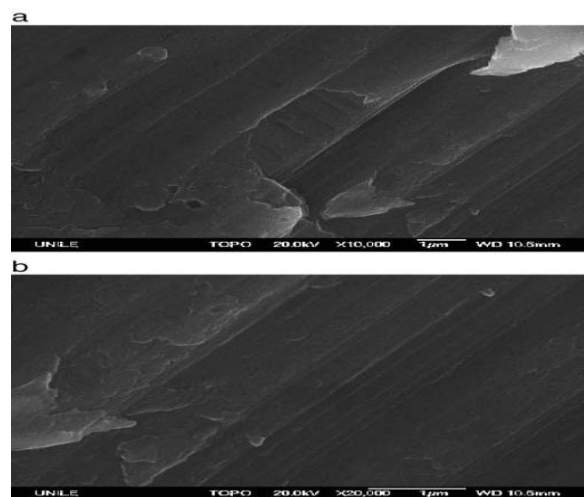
Fine fatigue striations observed on the fracture surface of the specimens tested at 210 (a) and 180 (b) MPa.
